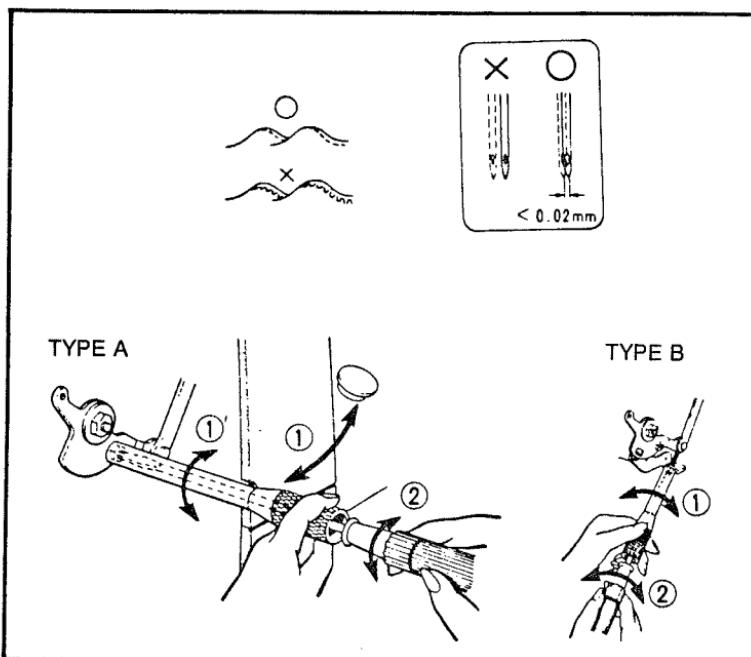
When the Brother XL5001 is set for straight stitching, the stitches should be unwavering to within a tolerance of .02mm.
